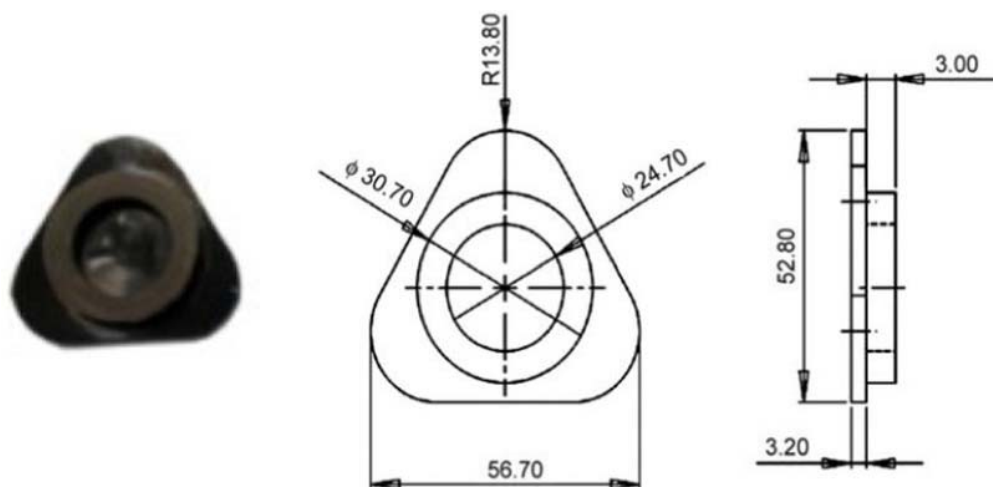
Ring form of rubber samples selected for the frictional testing (left) as well as the dimensions in millimeters (right).
